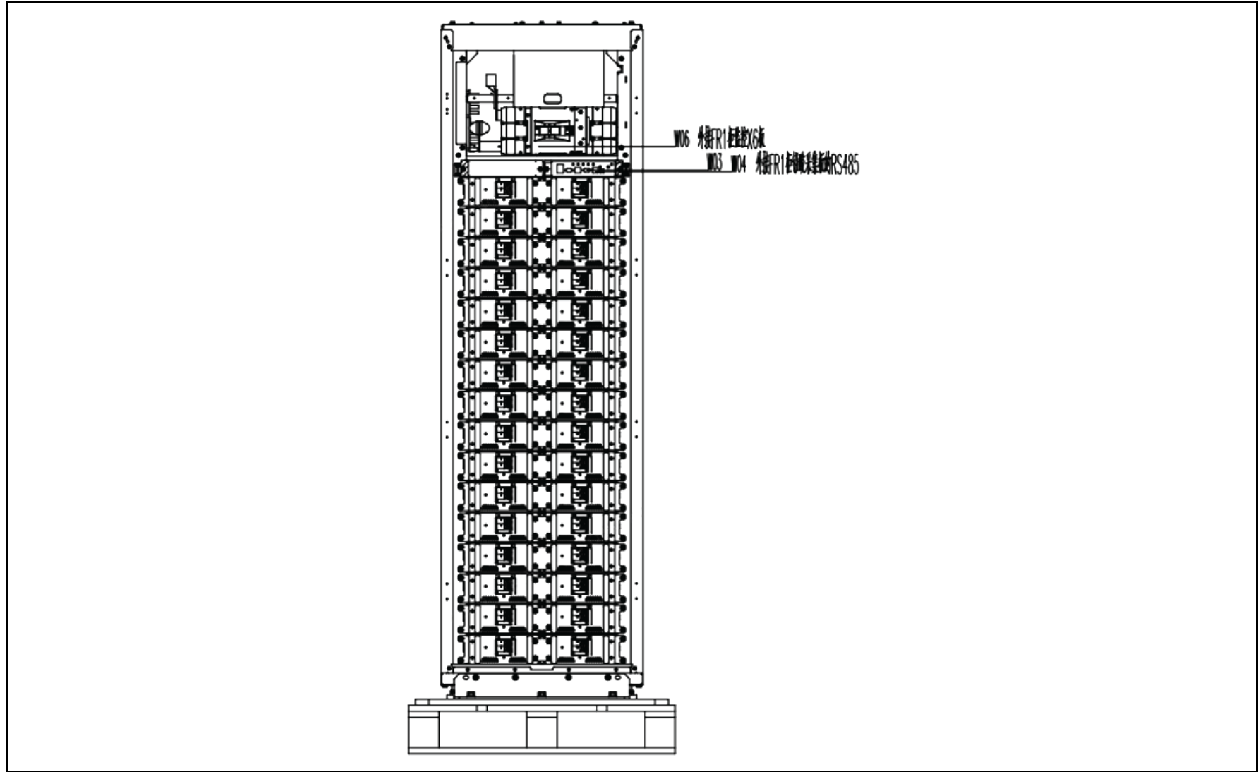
Vertiv™ Liebert® APM2 Modular EBC Outline Drawing and Main Components (Rear View)
